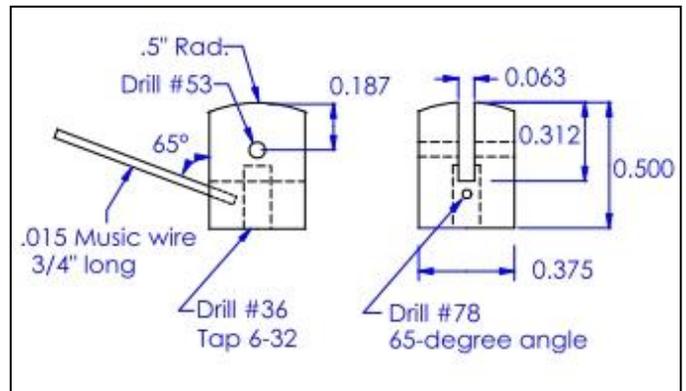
Construction drawing for the fusee iron mount. The material is 3/8" brass rod.
